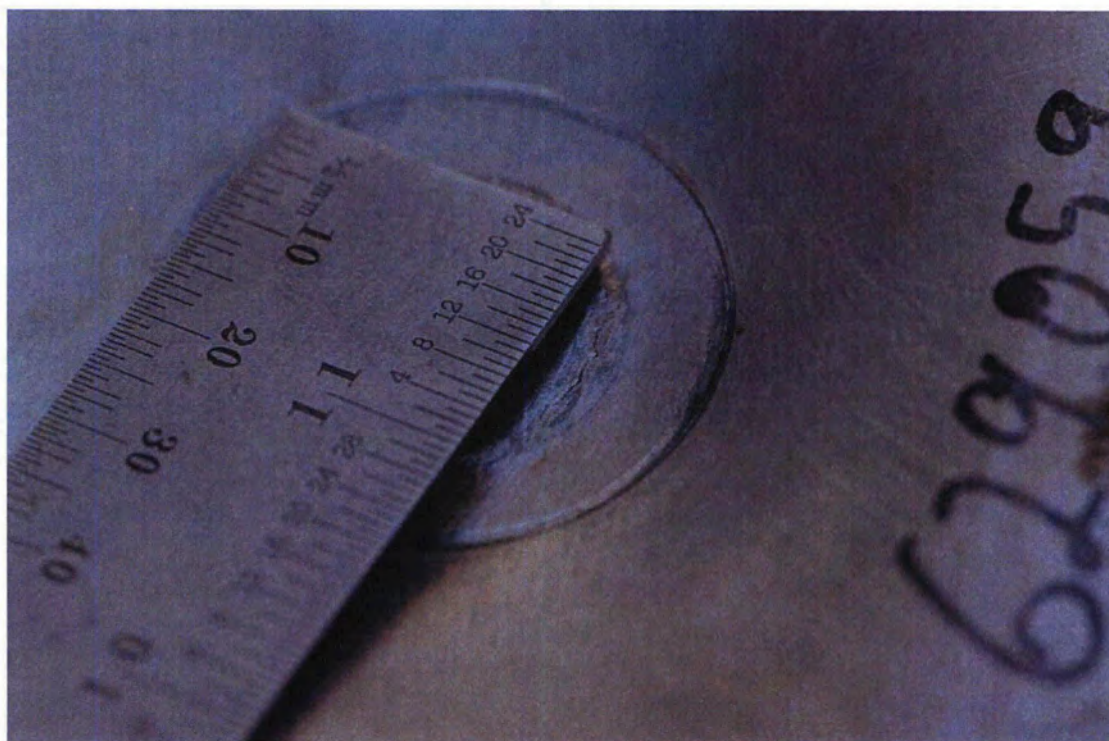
Cracked Weld Under Index Lug, CD2.C-1
